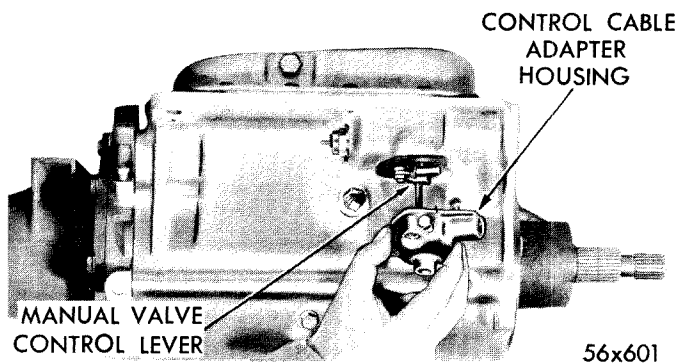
Removal and Installation of Control Cable Adaptor Housing
